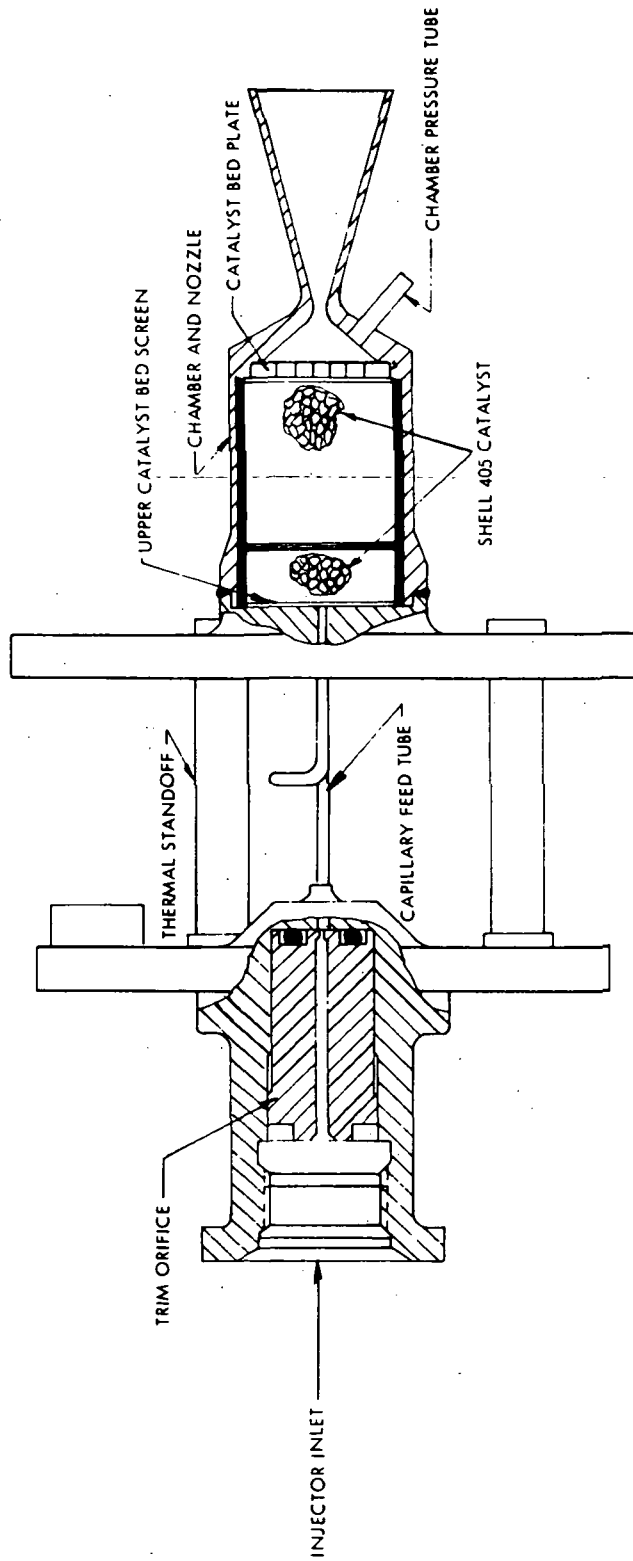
Cross Section of 0.5-lbf Reactor Assembly
